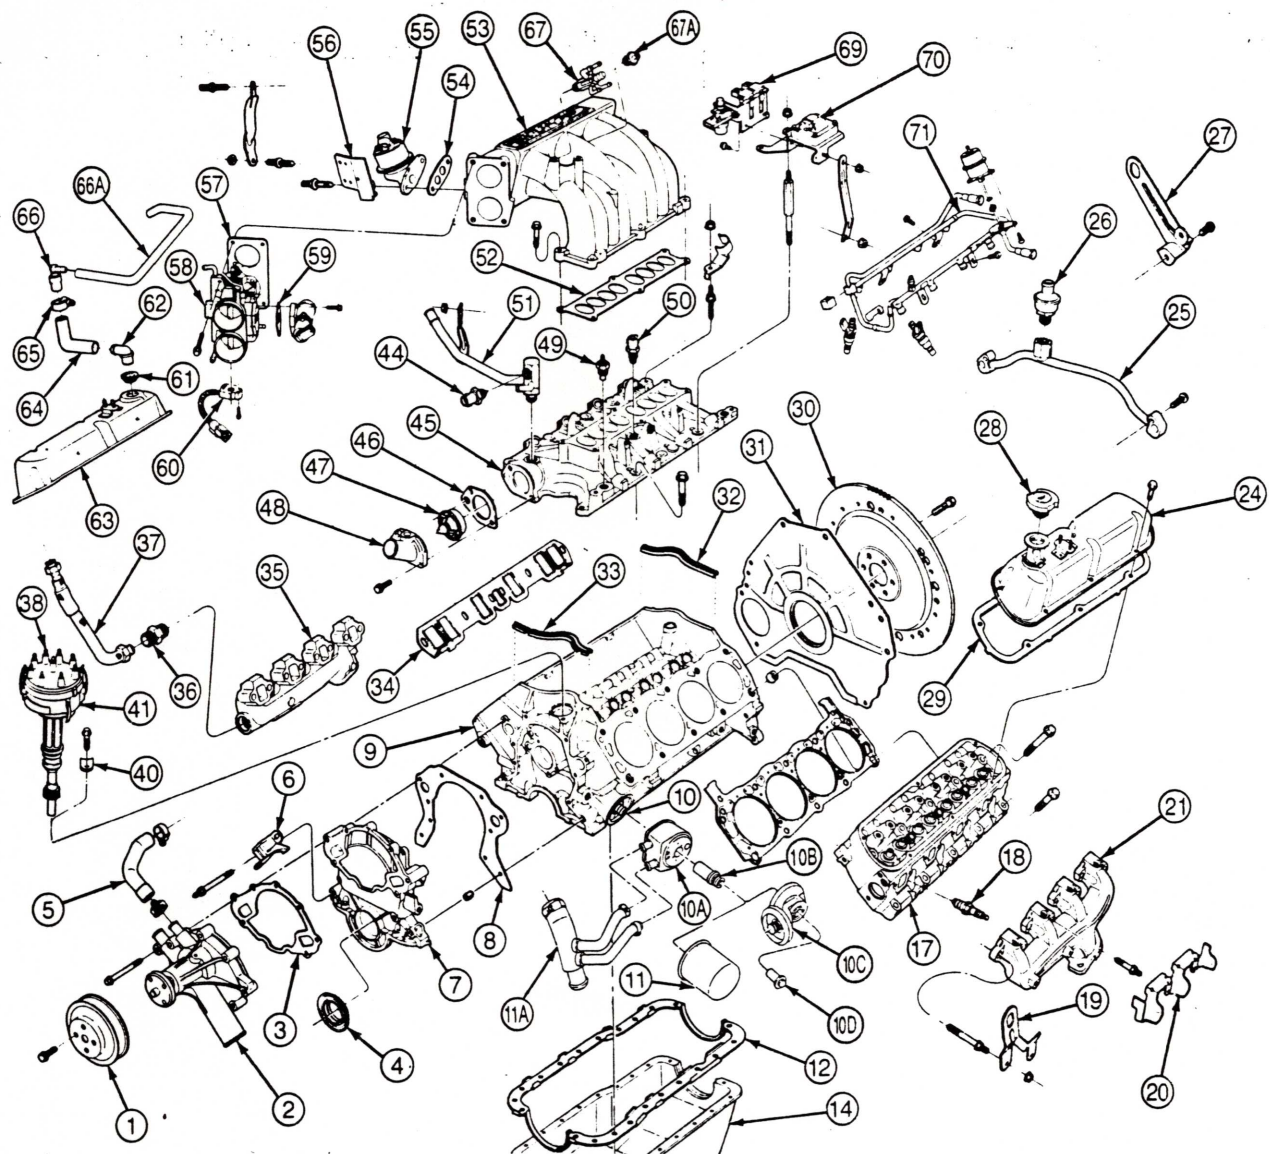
ENGINE AND EXTERNAL ENGINE COMPONENTS
